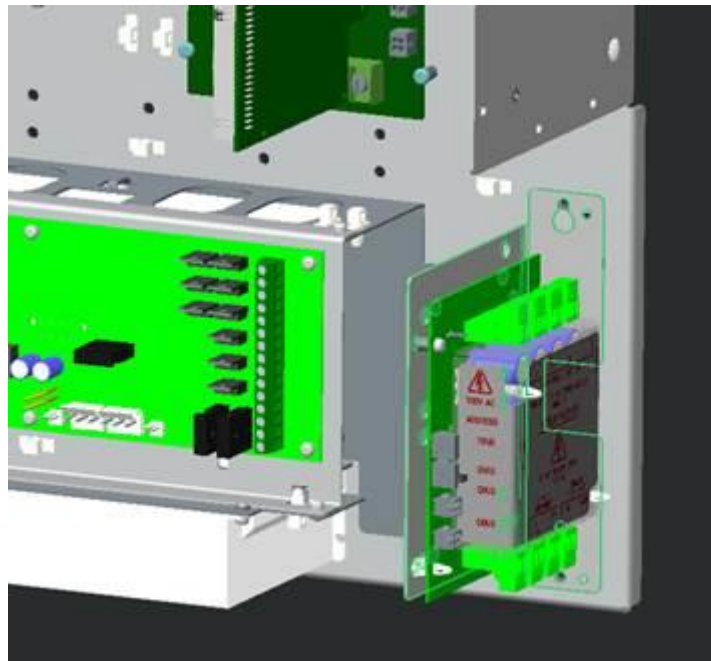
100V Switching/Splitter Module mounting on 15U Gearplate
